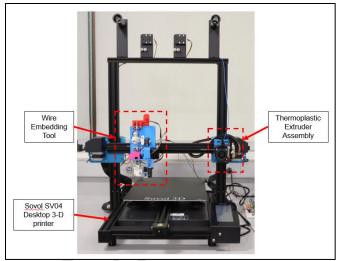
Wire embedding tool mounted on Sovol SV04 3D printer.
